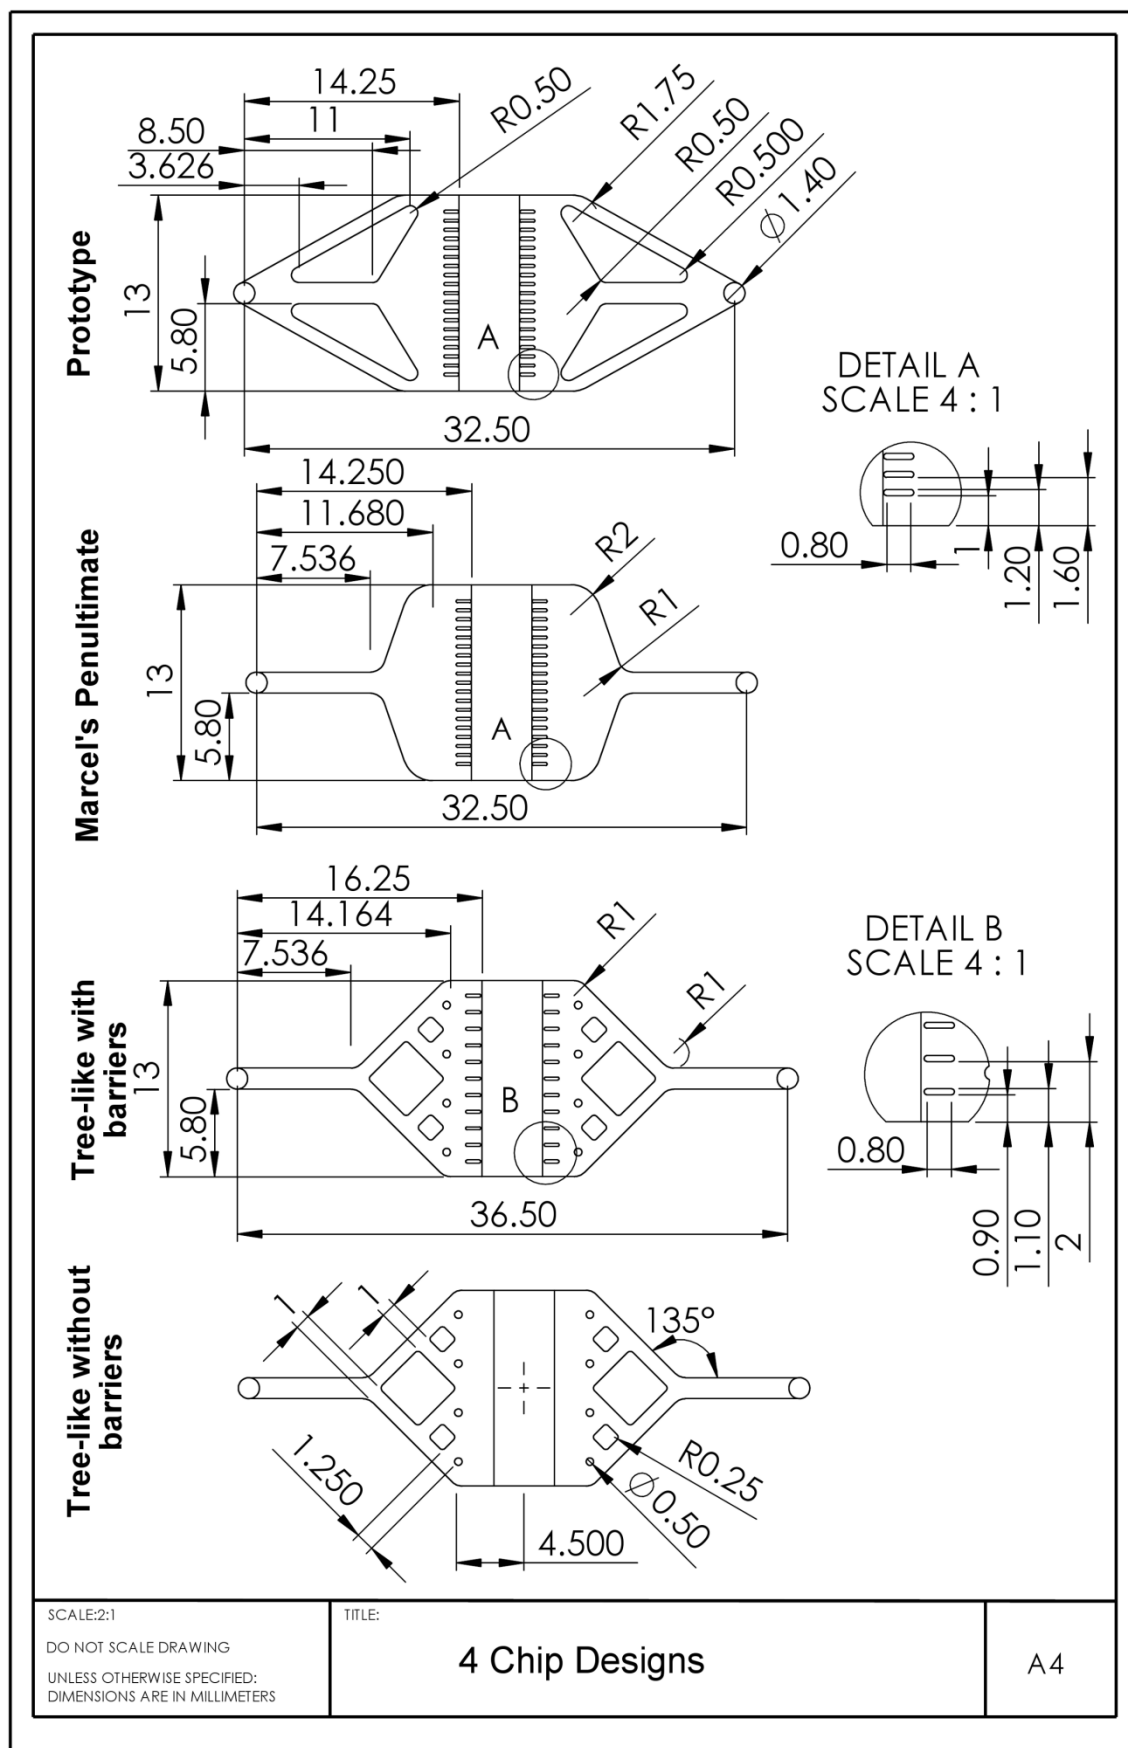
Technical drawings of the four PDMS chip designs modelled.
